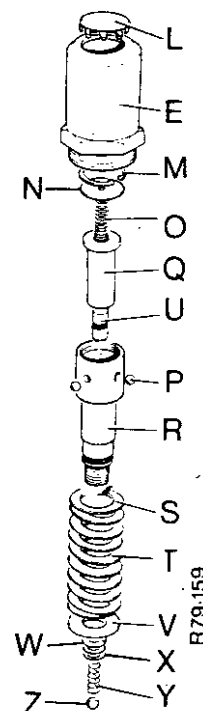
ASSEMBLY OF THE THROW-OUT MECHANISM
